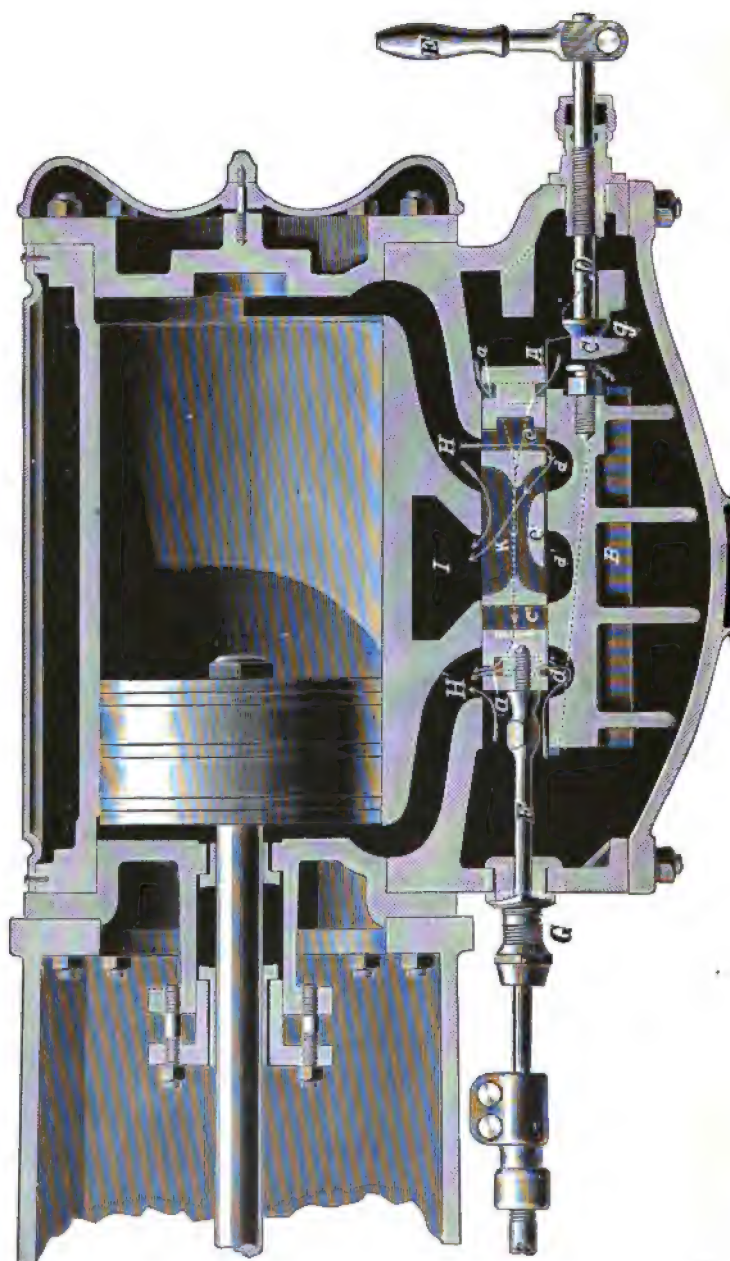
SECTION OF CYLINDER AND VALVE.
